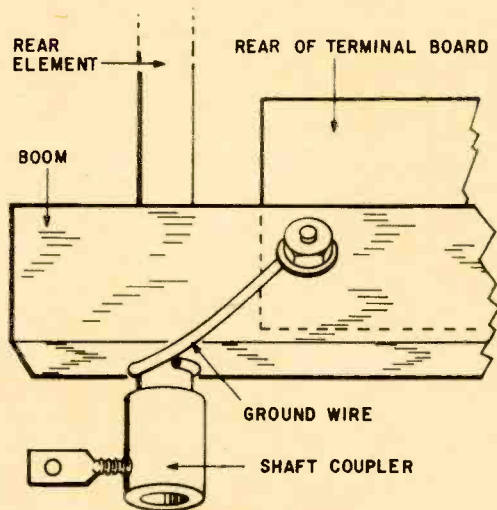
Ground wire detail. Sandwich wire between washers before installing on screw. Screw comes through coax braid, board and boom.
